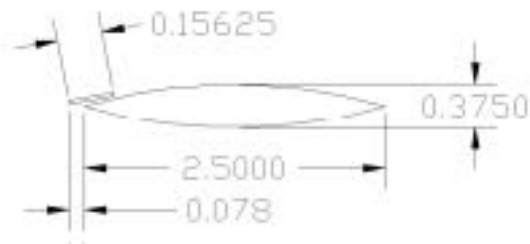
Sharp edged airfoil dimensions (all dimensions in inches)
